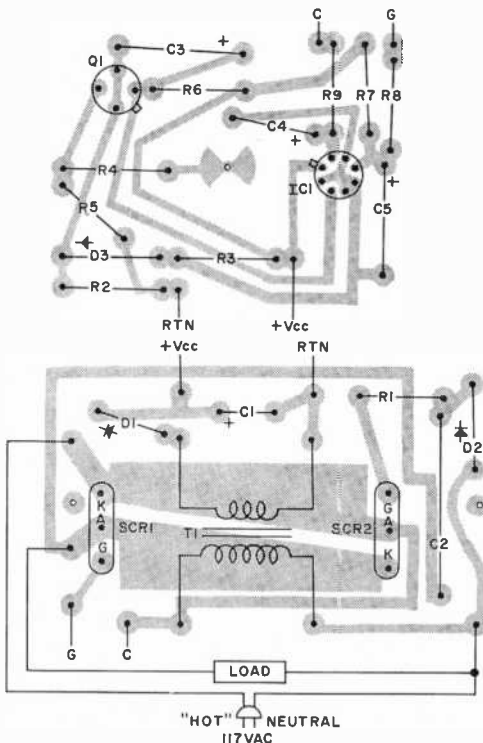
Foil patterns for two printed circuit boards are shown above with component layouts below. Touch plate mounts in the center of small board.
